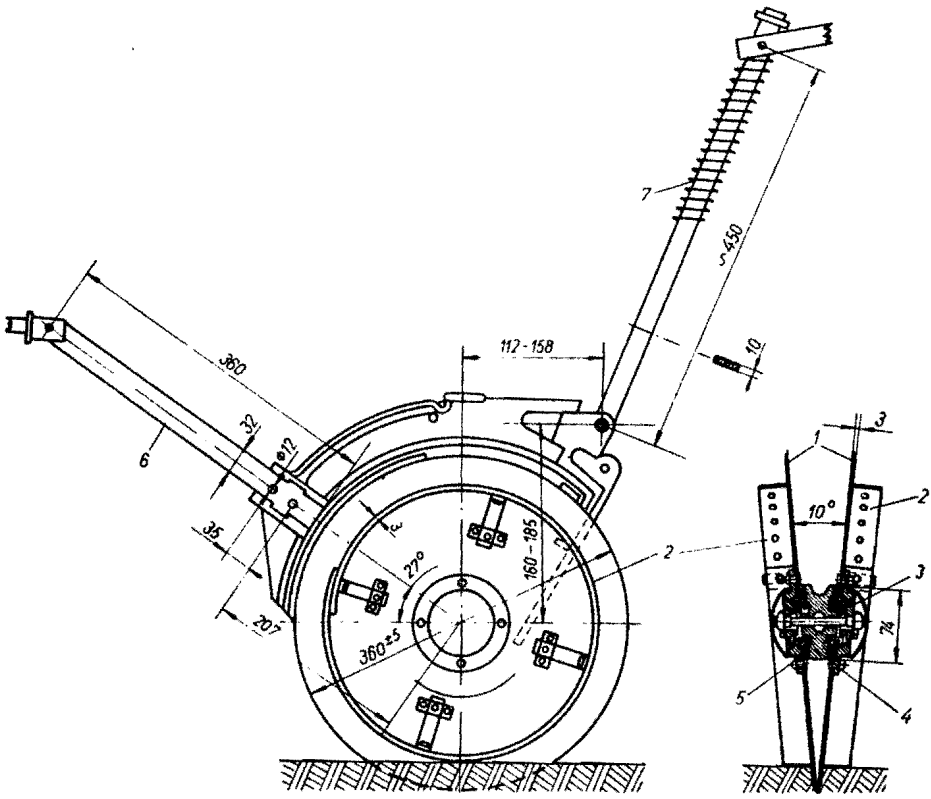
Example of a double-disk opener: 1—disks; 2—adjustable flanges controlling feeding depth; 3—tapered hub; 4—insert; 5—packing ring; 6—opener lever; 7—push spring.
